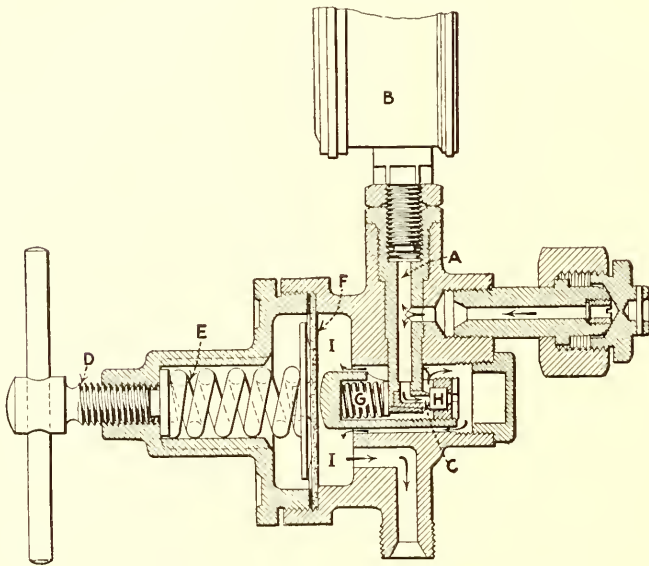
Details of Oxweld Oxygen-Pressure Regulator.
